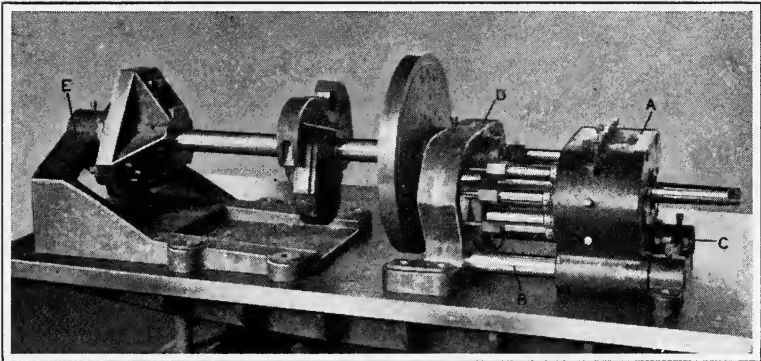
Continuous Drilling Fixture having Three Work-holding Stations
